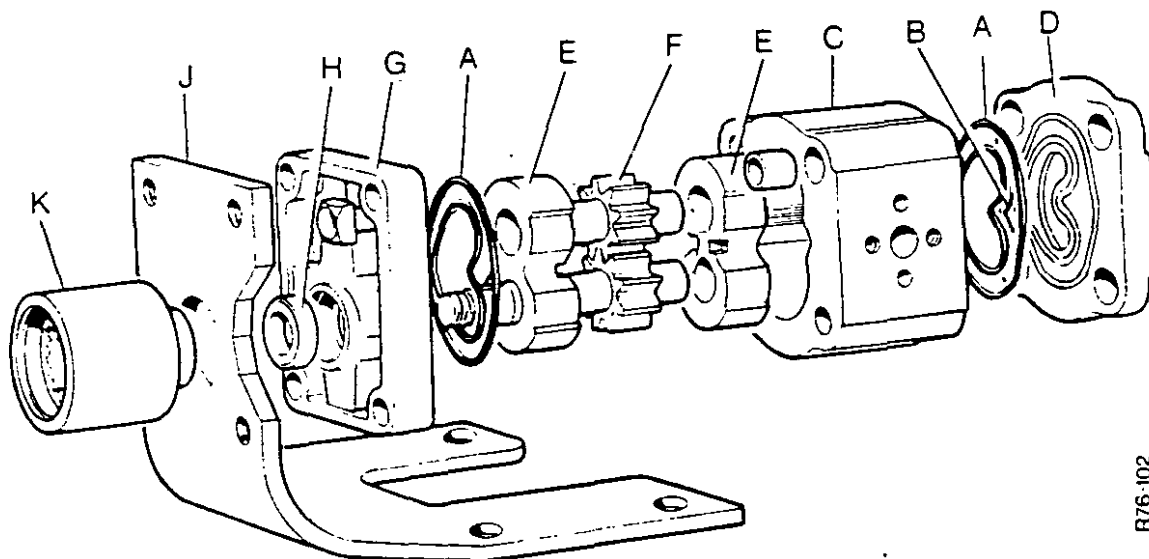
FITTING THE BEARINGS AND ROTORS
